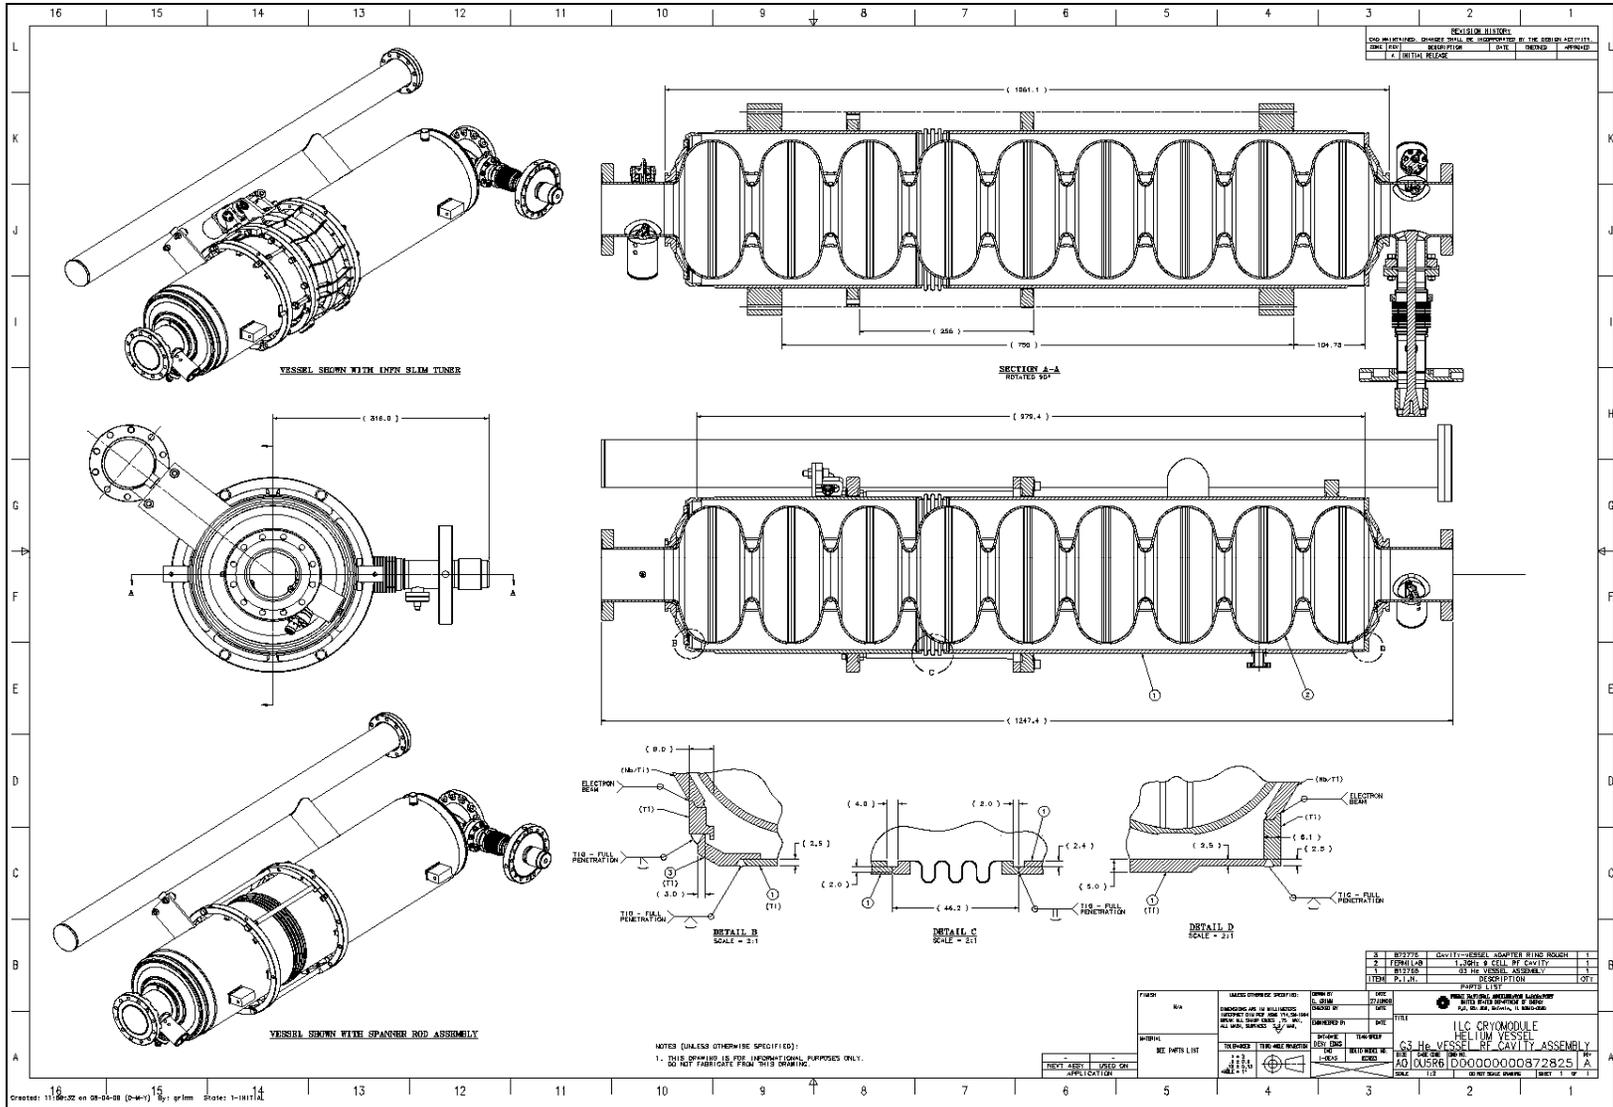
G3 Helium Vessel RF Cavity Assembly (Drawing 872825 – Sheet 1)
